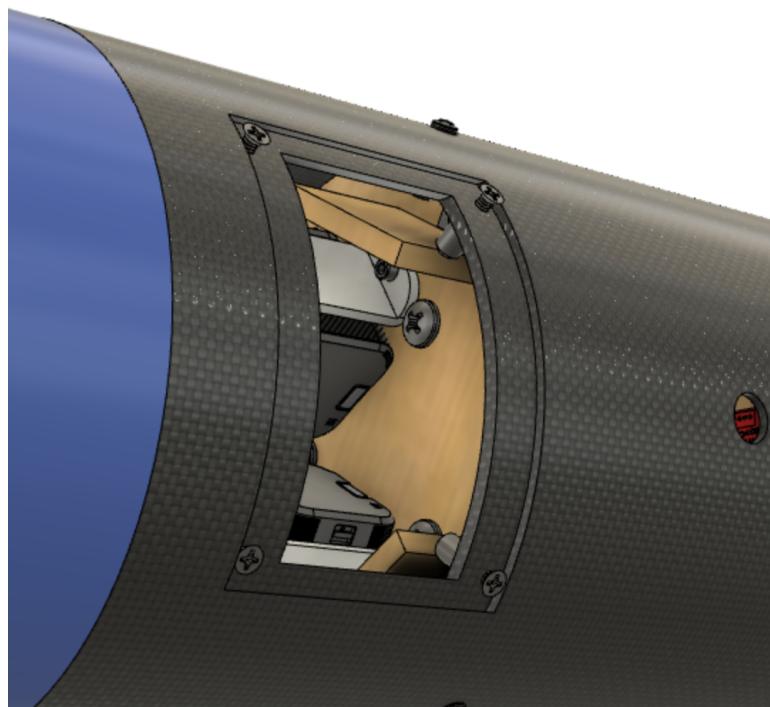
Access Panel detail. Aft of the access panel, a camera hole is visible.
